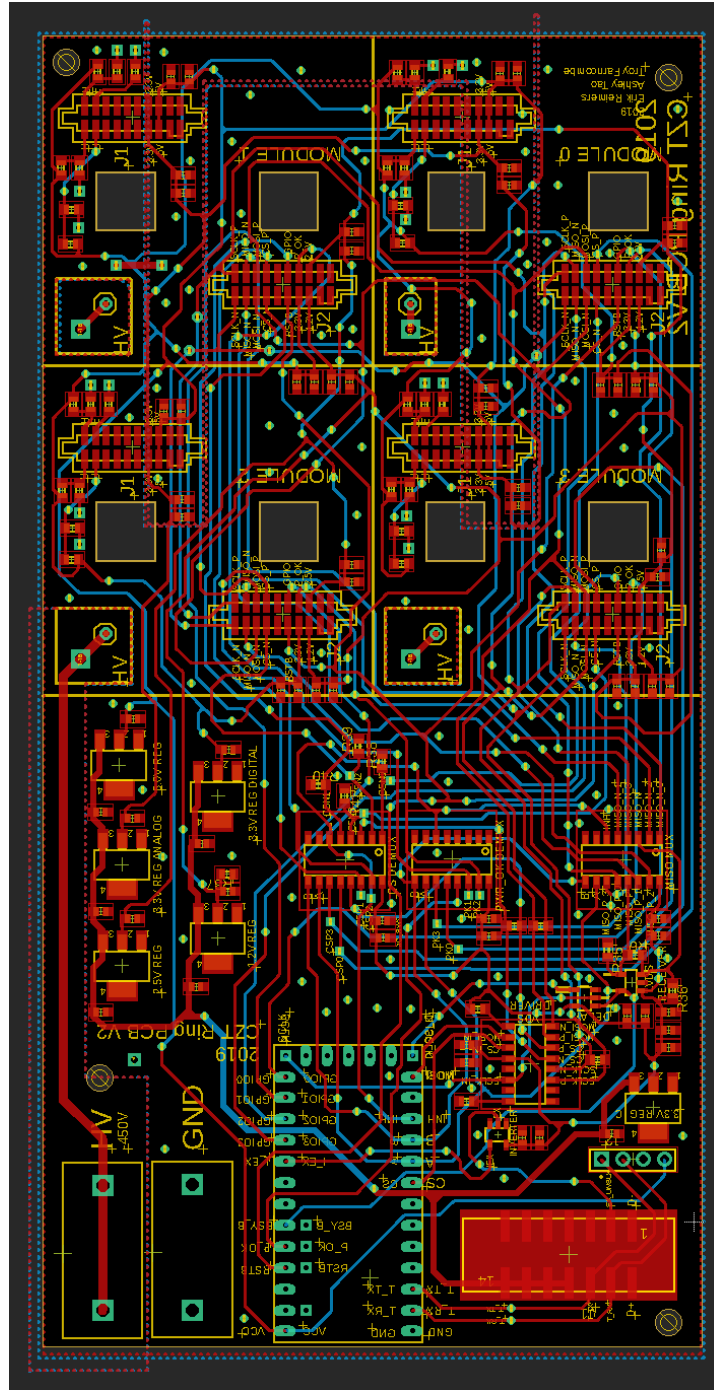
Gamma camera PCB board view design shown in EAGLE.
